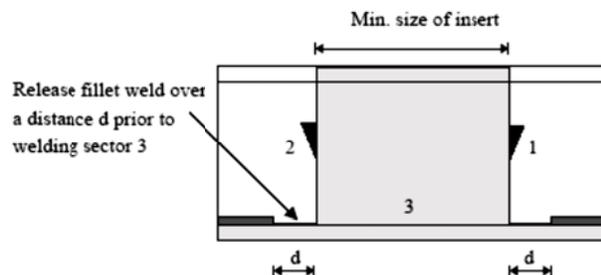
Welding sequence for inserts of stiffeners
